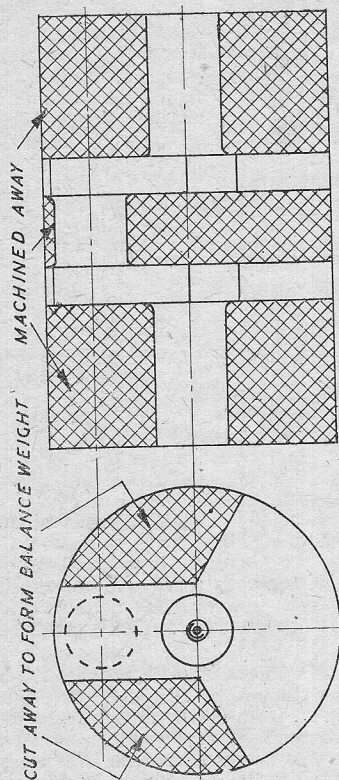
Unbalanced crankshaft cut from solid round bar. (Cross-hatching shows metal to be removed)
